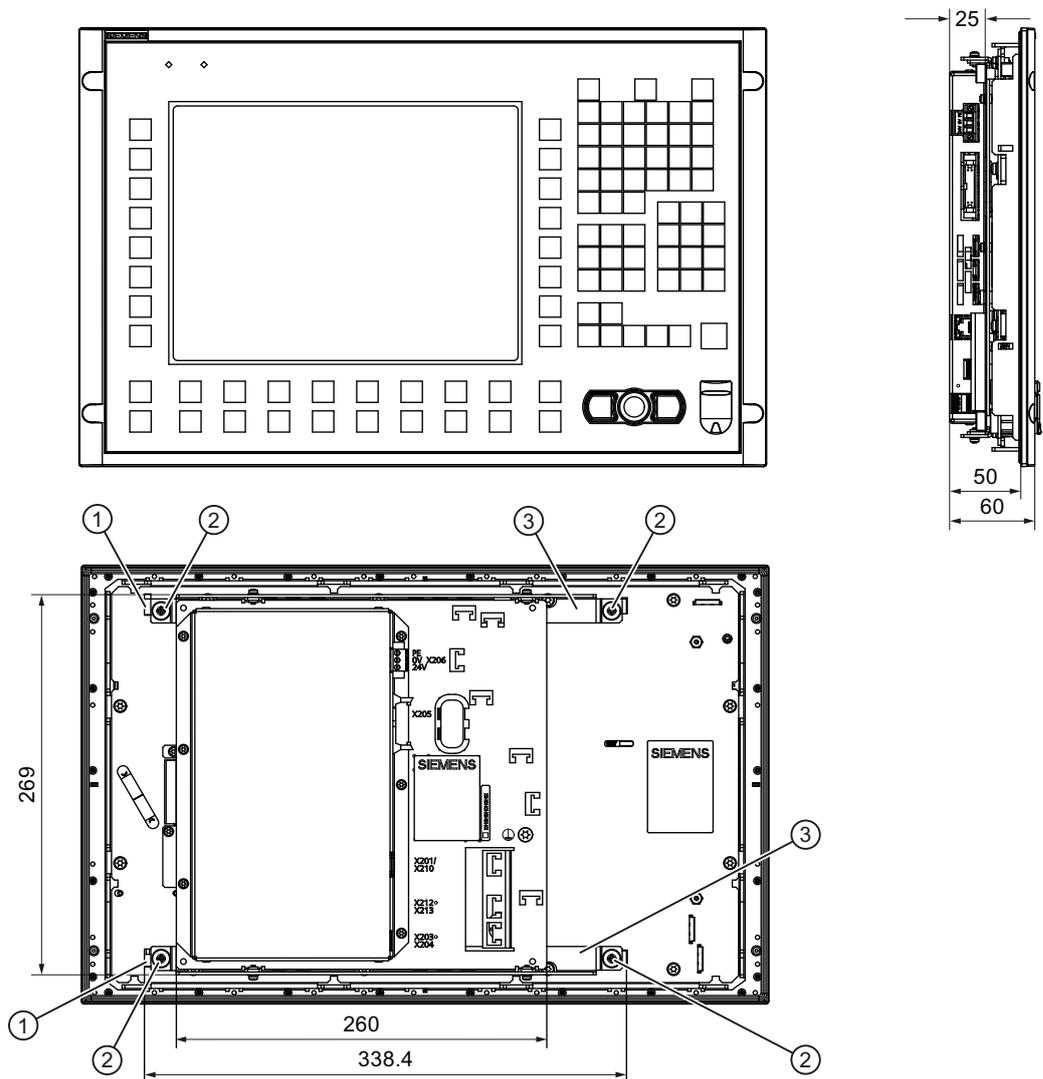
Mounted TCU with OP 010S, front, side and rear view
